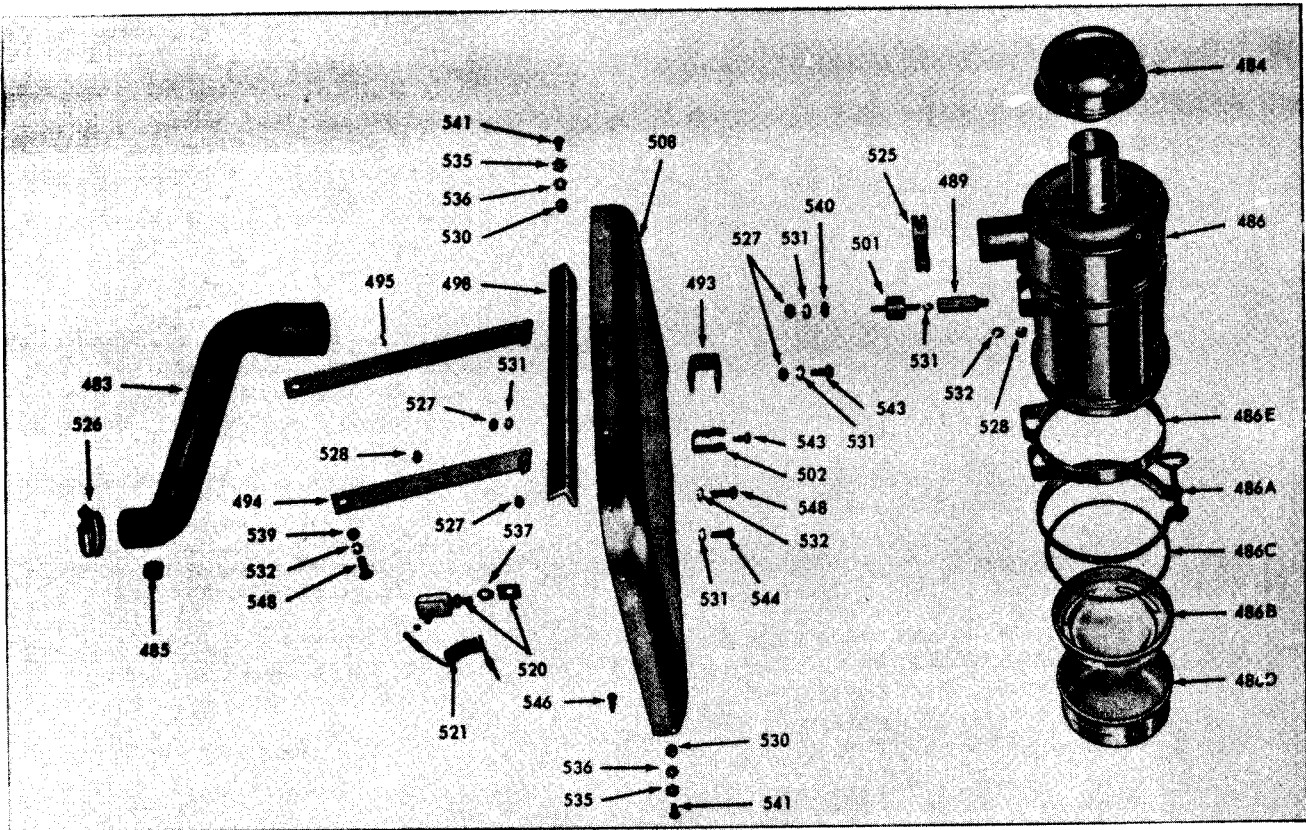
, END PANEL AND MILITARY AIR CLEANER per MIL-E-11275-C specification
